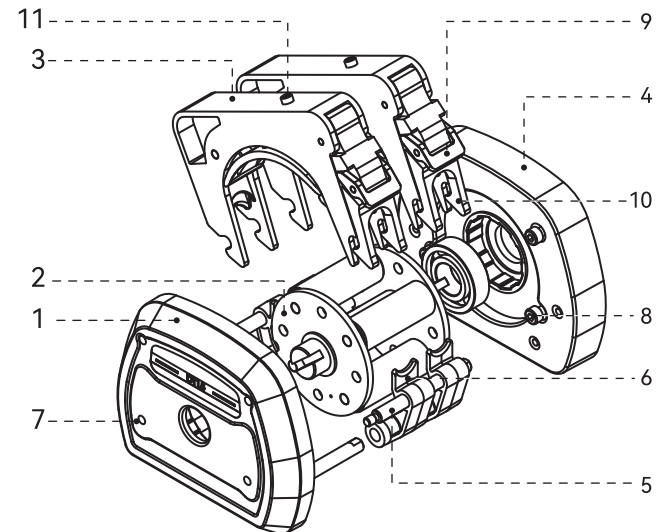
DT15 Pump Head (Equipped with 20 card assembly)
